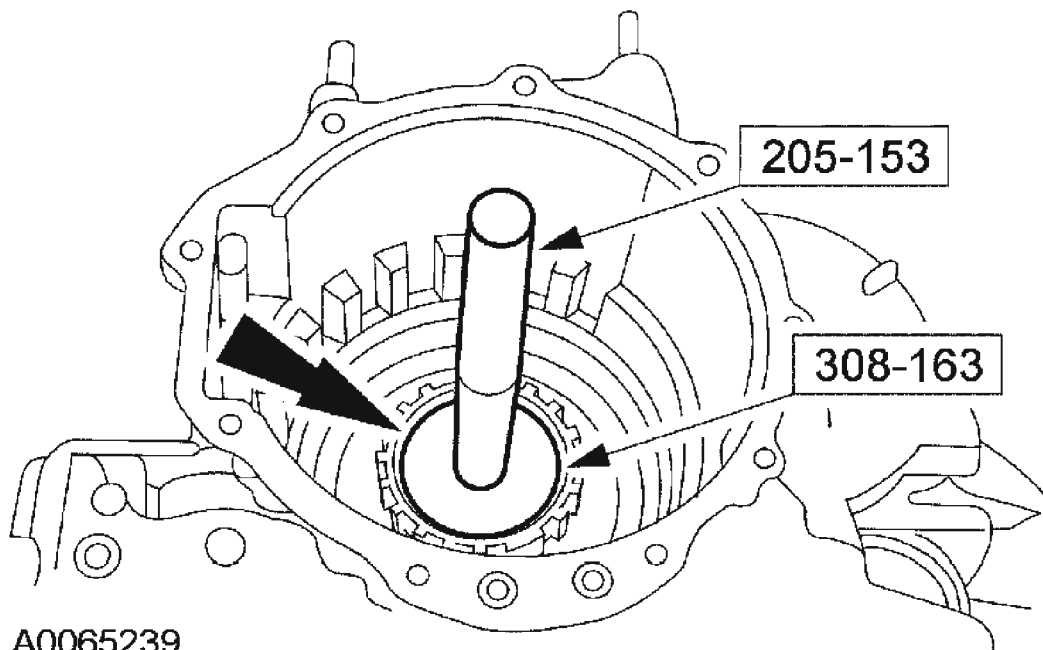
Installing Final Drive Input Gear Bearing Cup Using Special Tool
